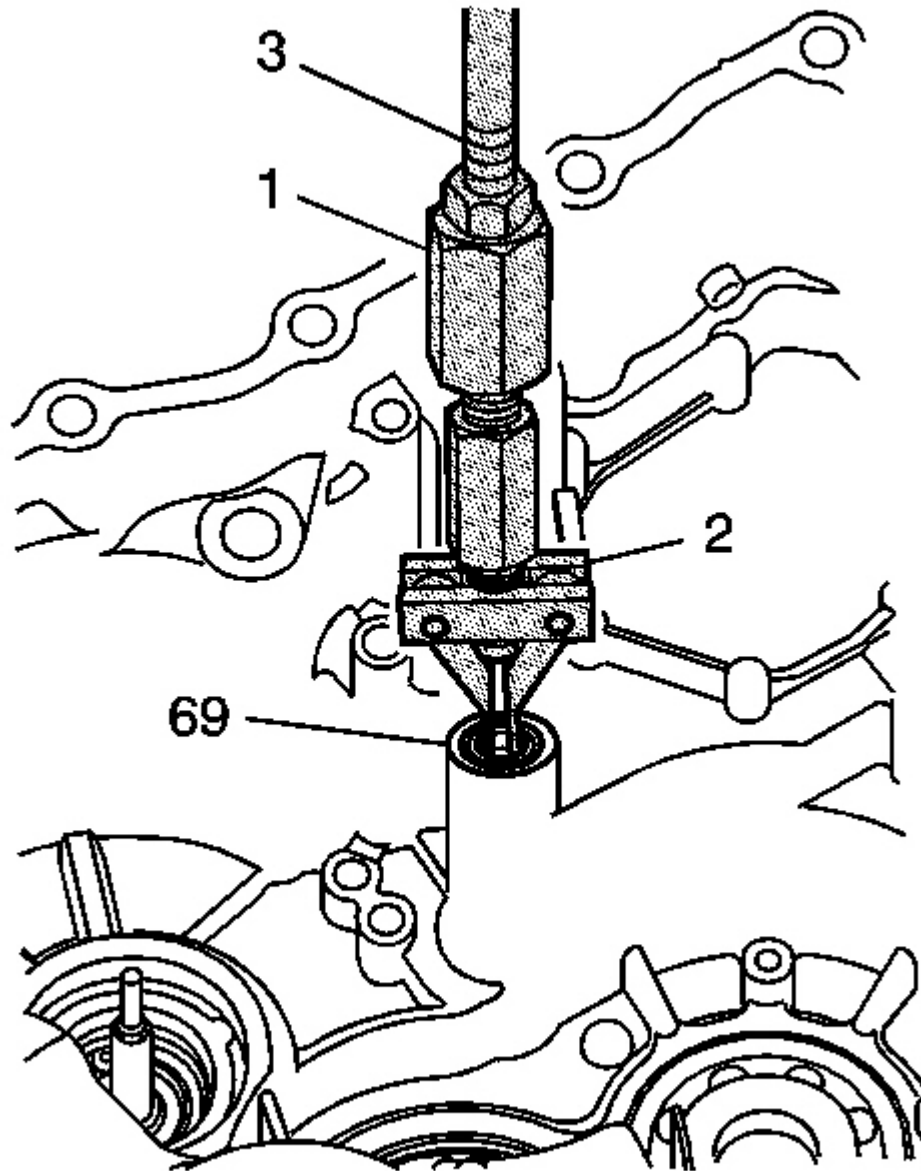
Remove The Park Pawl Actuator Bearing Using DT 46424, SA9133T & SA9133T-1
